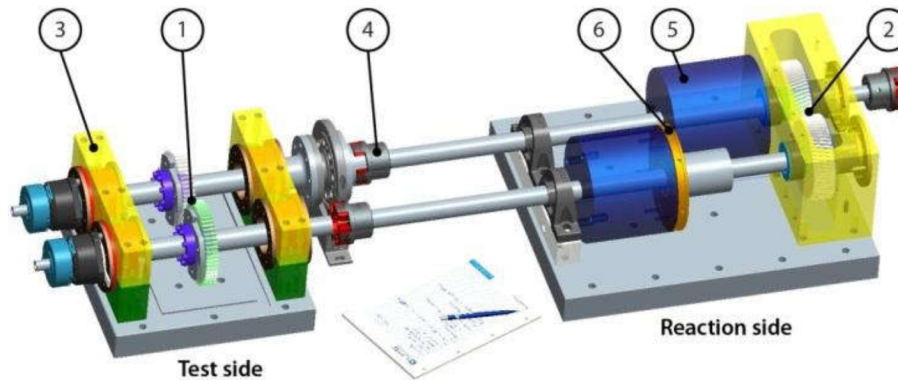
Test-rig three-dimensional representation. 1. Test gears; 2. Reaction gears; 3. Bearings support; 4. Flexible couplings; 5. Flywheel; 6. Clutch flange for preload.
